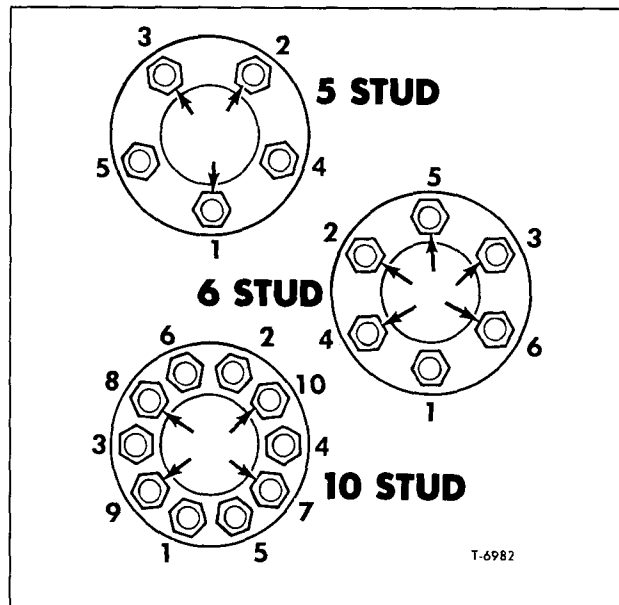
Wheel Nut Tightening Sequence (Disc Type Wheels)
